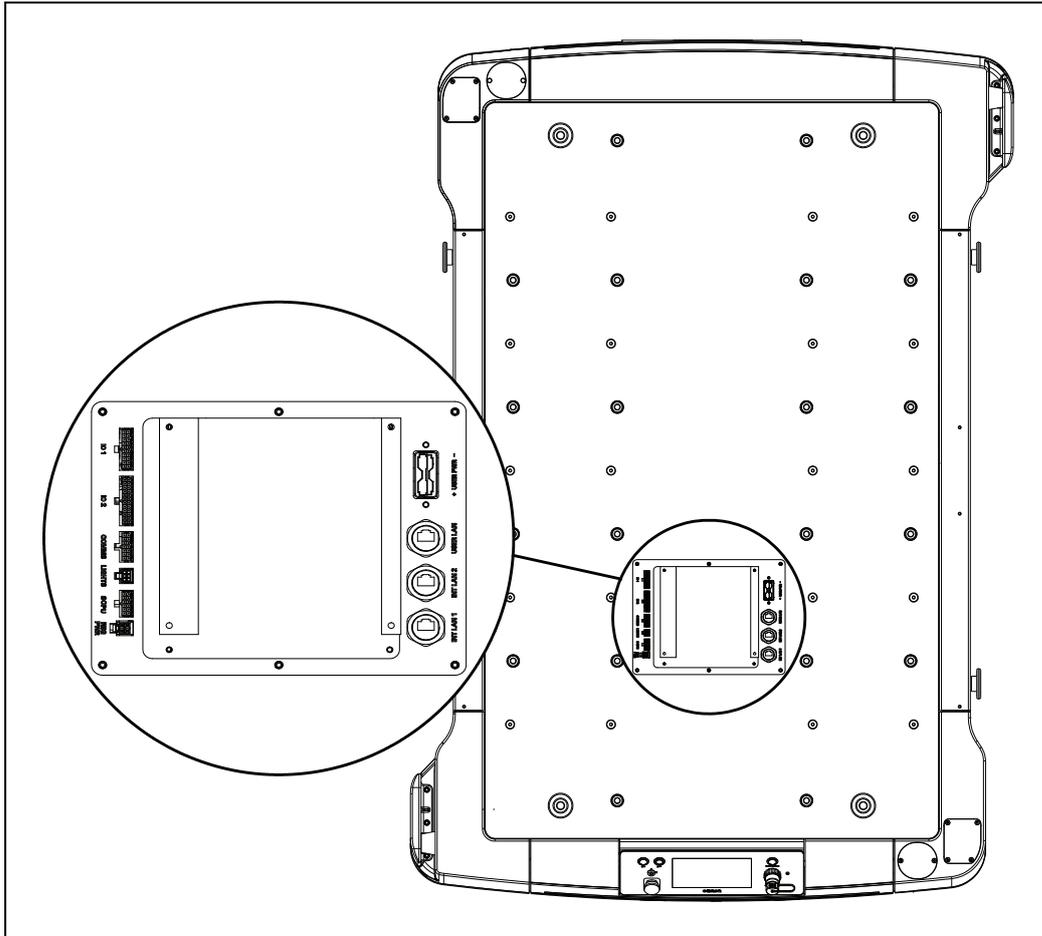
User Access Panel Location on the AMR (user access panel cover removed)
